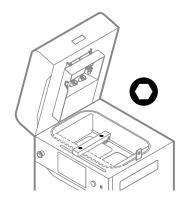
Set the Recoater and remove the screws from the Recoater cover.
